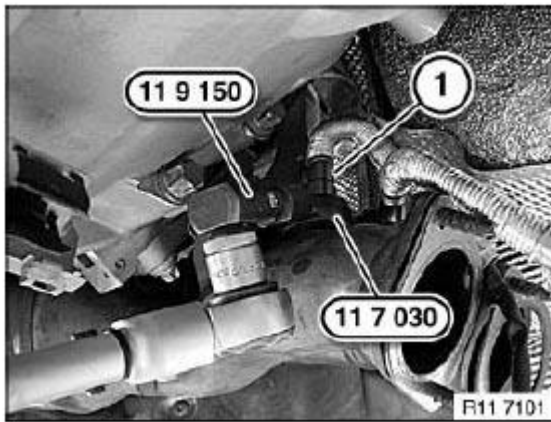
Identifying Oxygen Monitor Sensor And Special Tools (11 7 030, 11 9 150)
